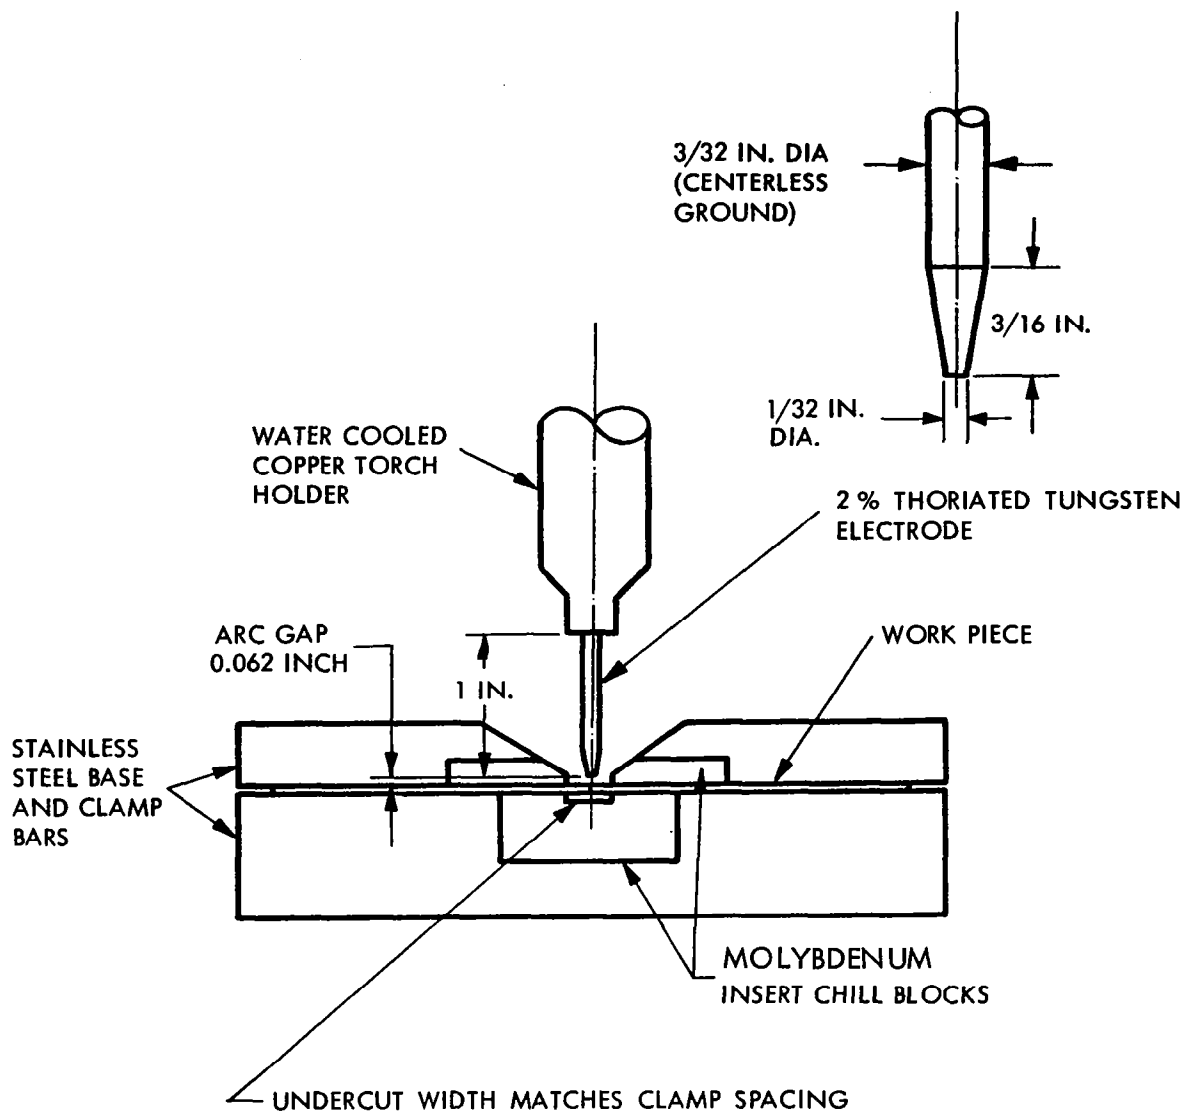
Weld Set-Up for GTA Sheet Butt Welds
